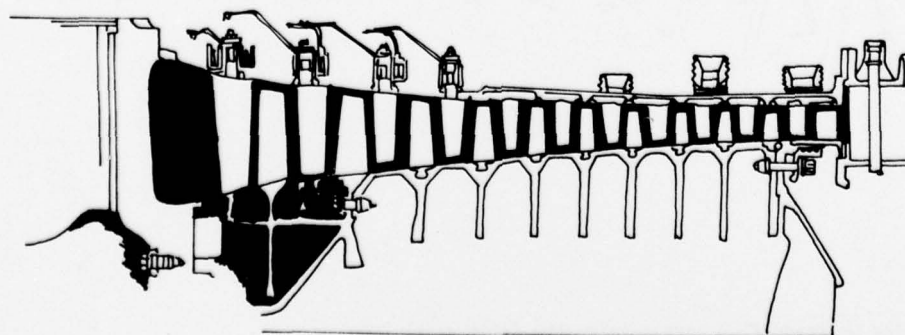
Compressor blading: variable and fixed vanes, and blades
